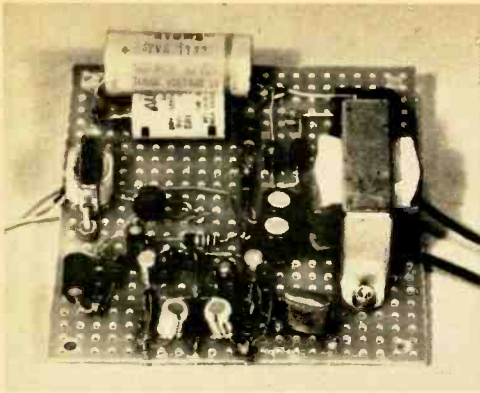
Completed amplifier board ready to be installed in cabinet. Wiring is tight in spots making it necessary to mount several parts on end.
